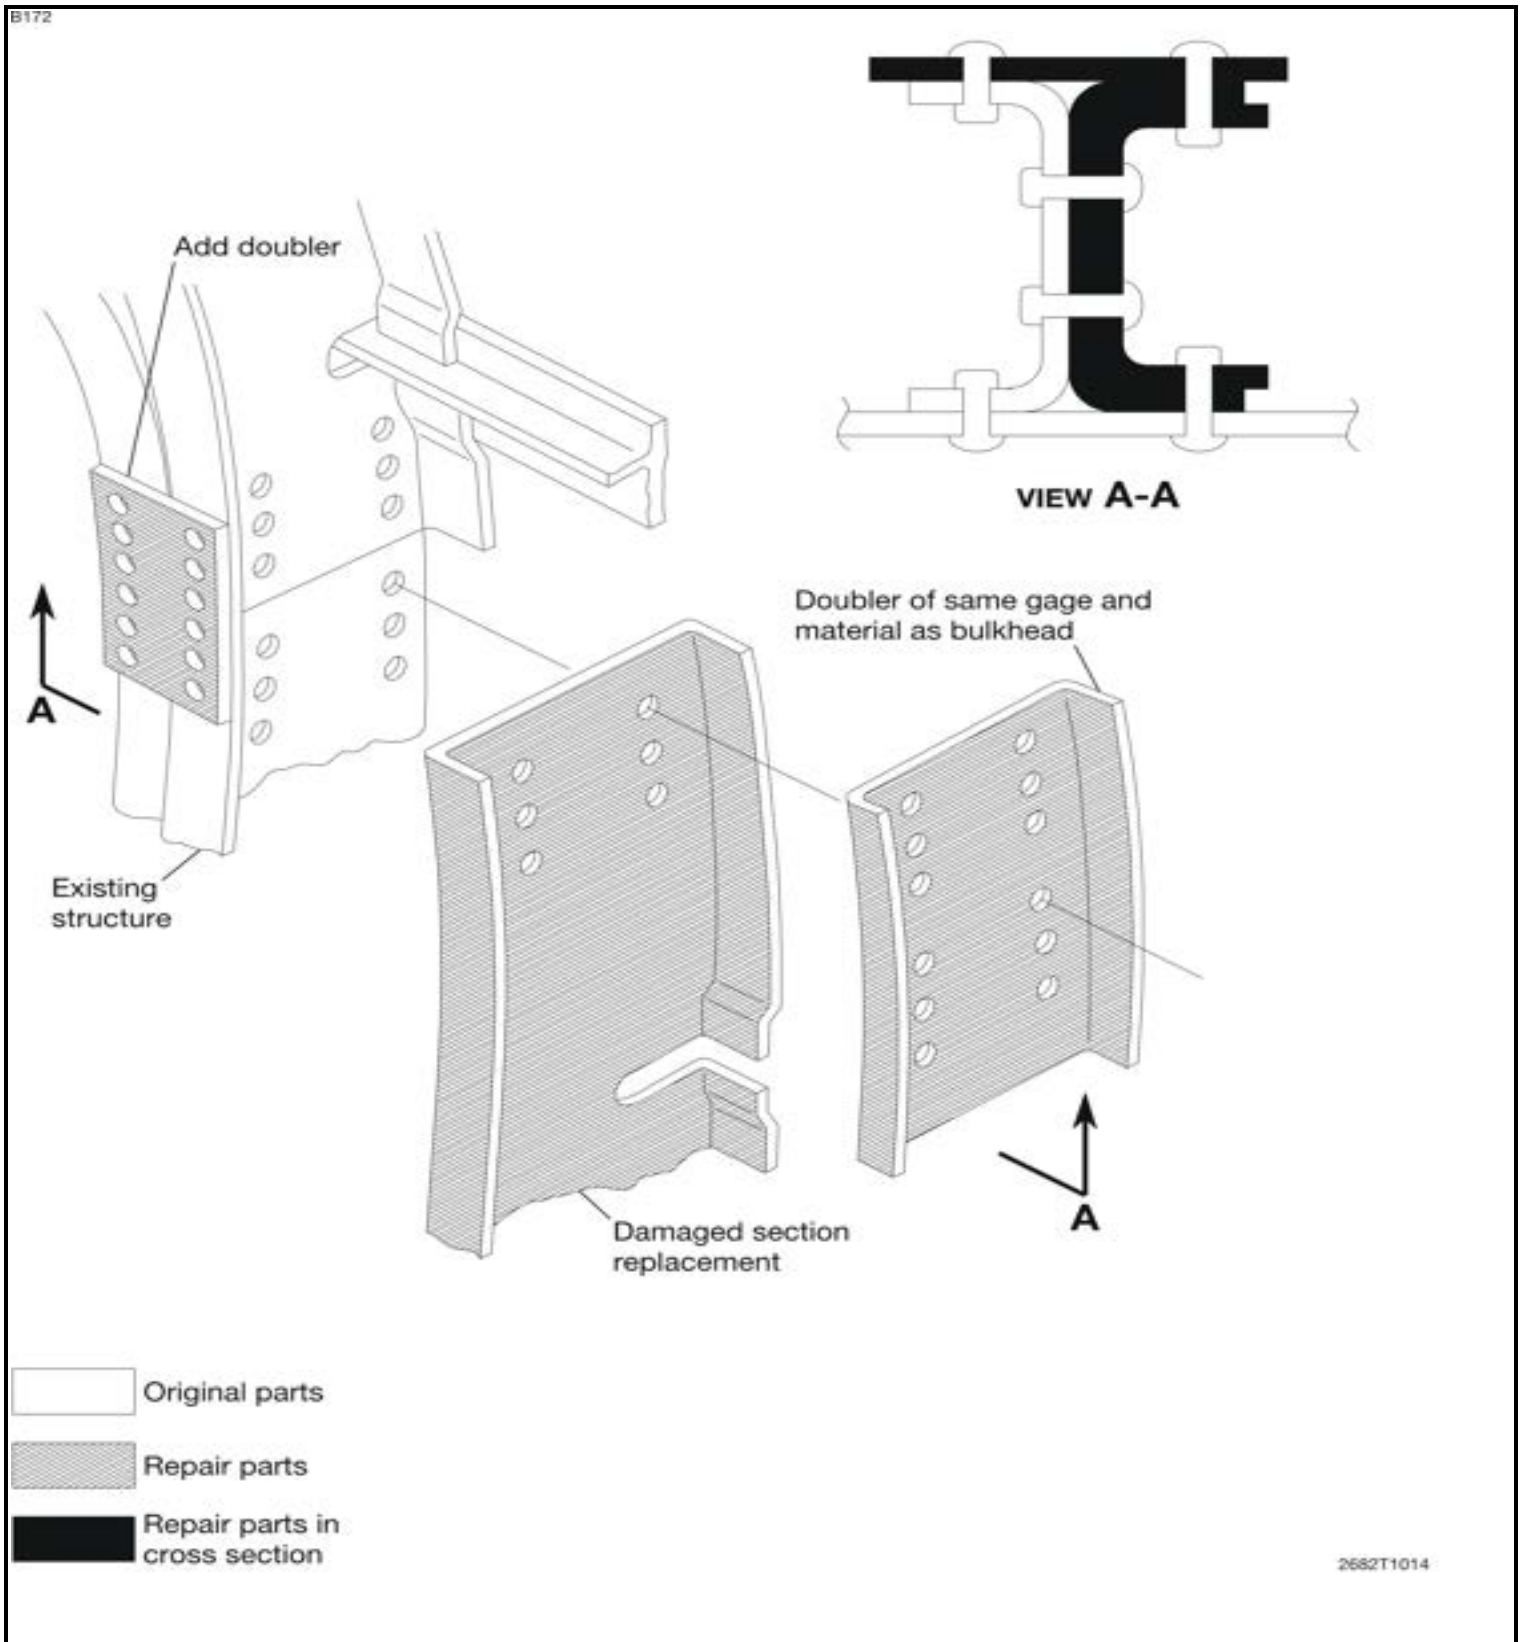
Sheet 2 : Typical Cabin Bulkhead Repair
